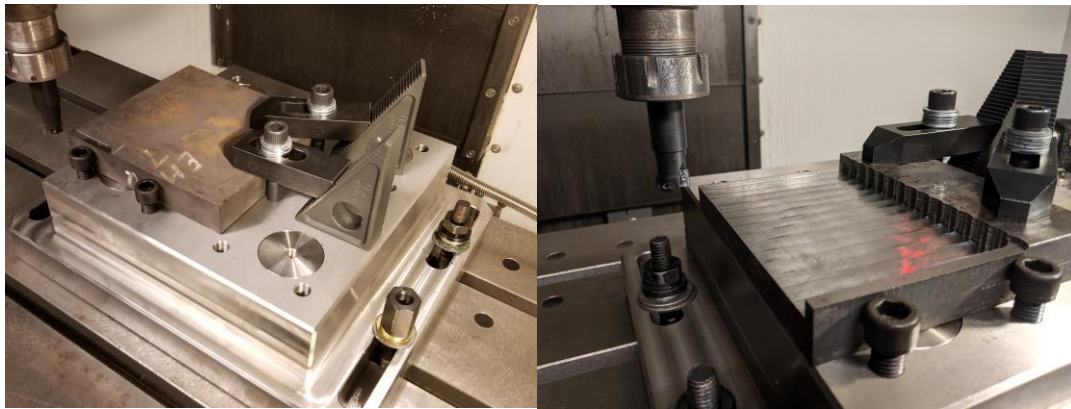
Images of Kistler dynamometer and workpiece mounted
